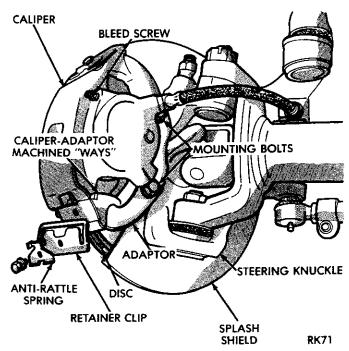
Chrysler Disc Brake Caliper Mounting—Rear View
